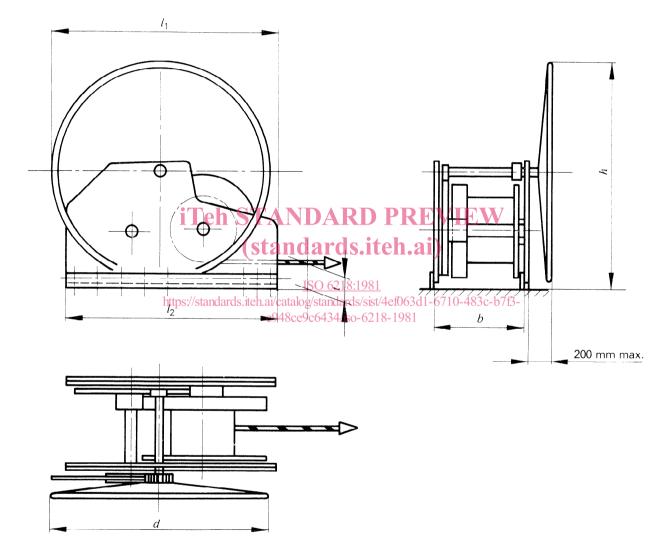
Coupling winch (the drawing shows a right-hand model)
